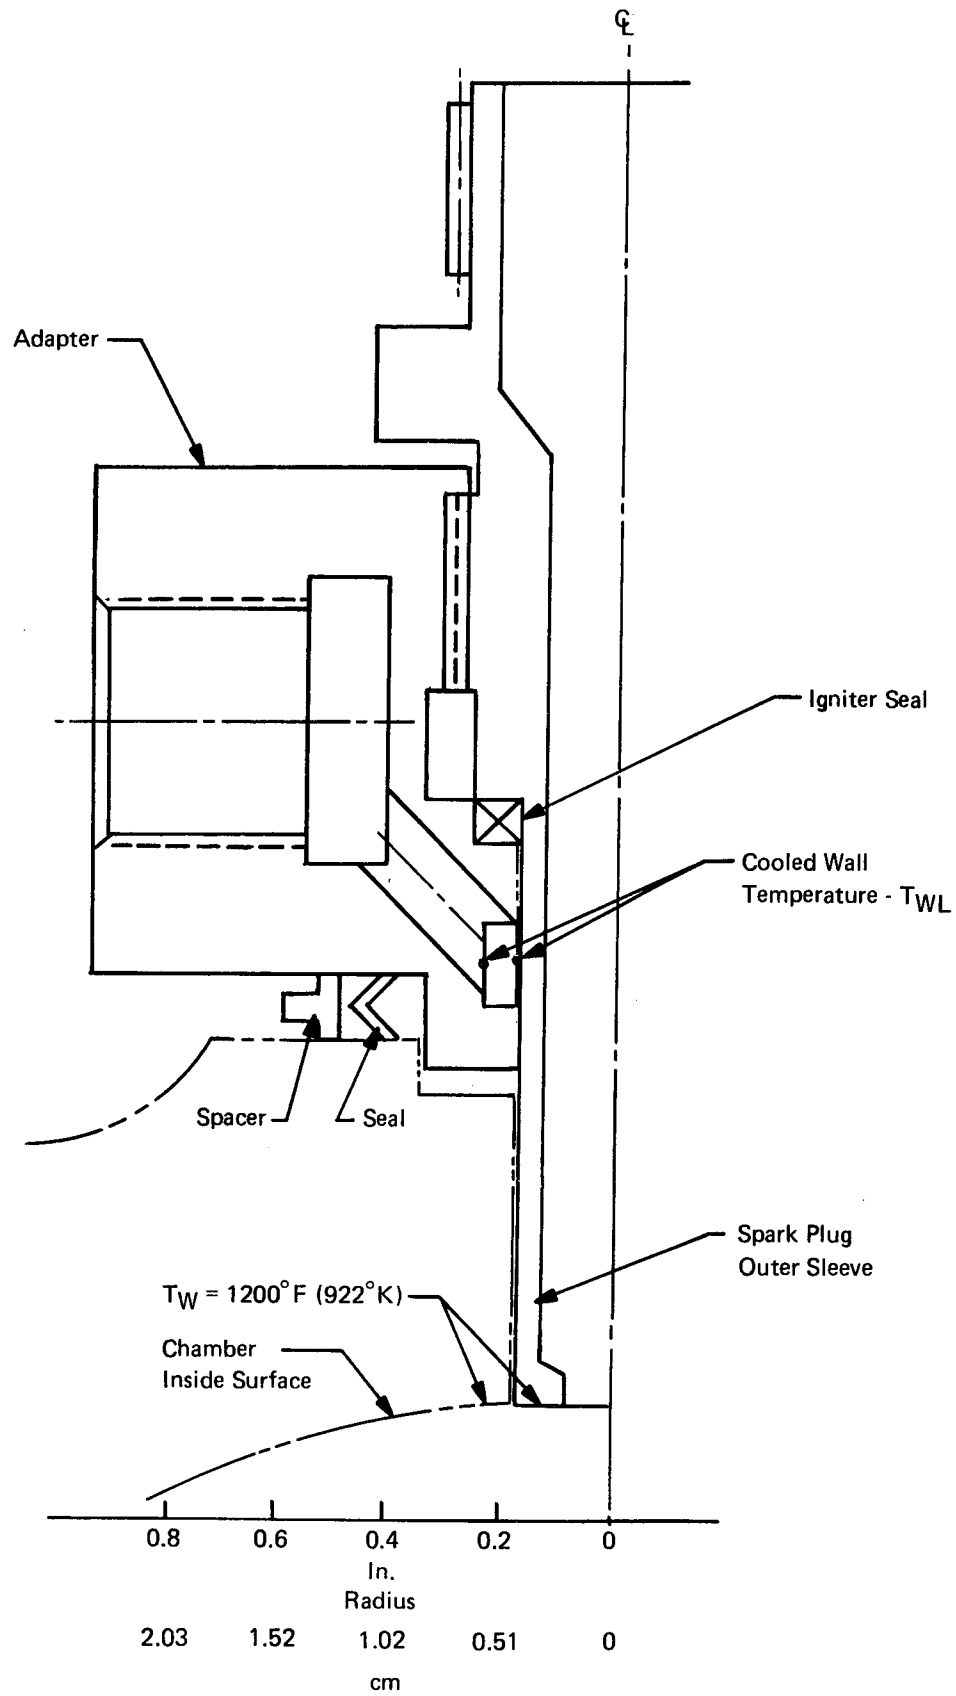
Oxidizer Augmentation Cooled Assembly Spark Plug
